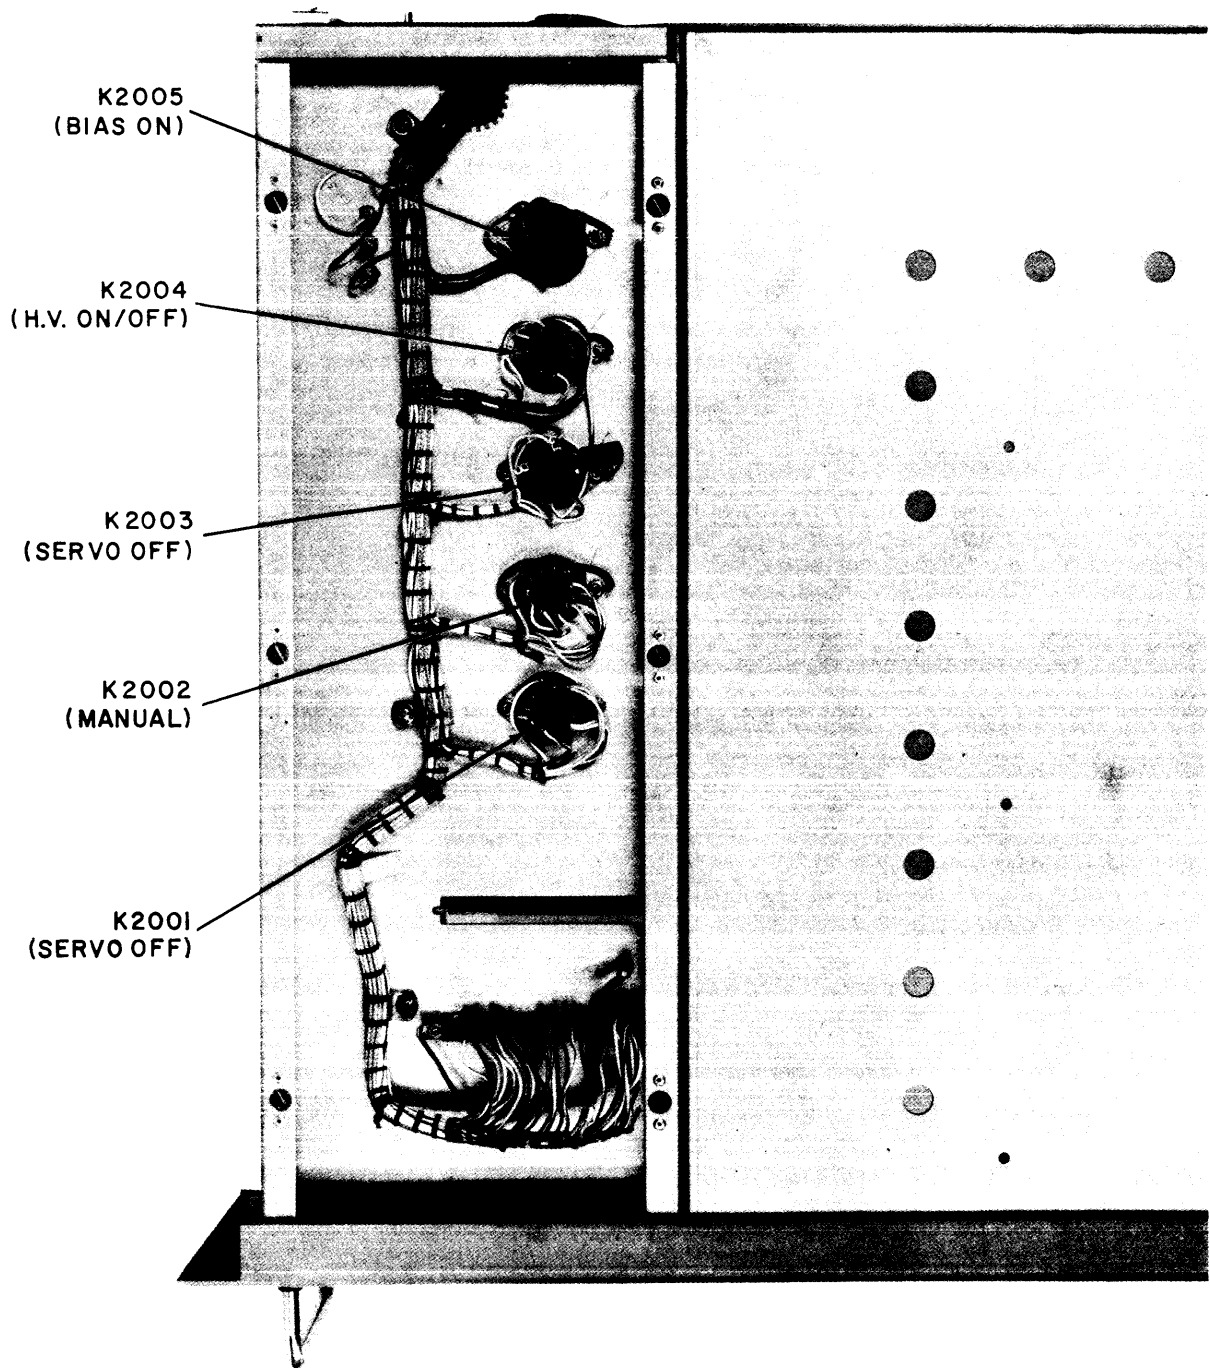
IPA Drawer AX-5080 Symbol Series Location Bottom View
